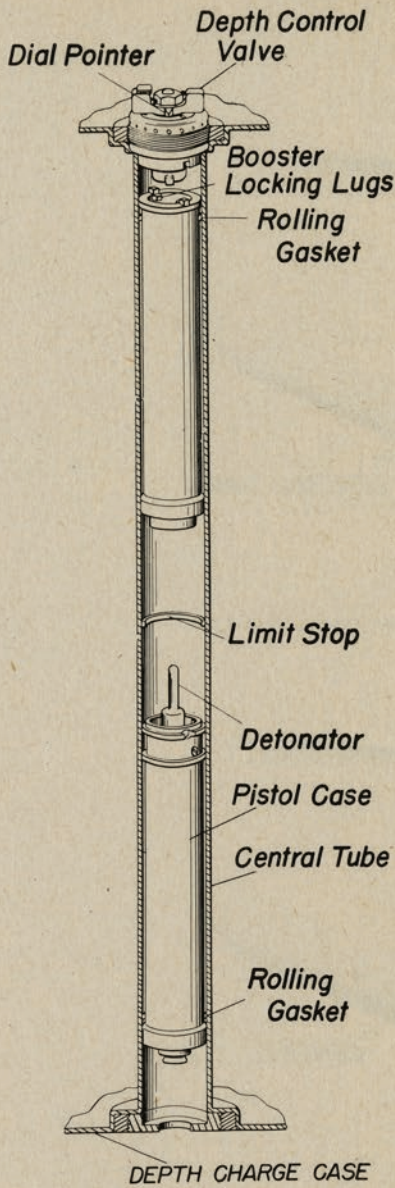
Pistol-Safety Fork Assembly, Type 95 Depth Charge
